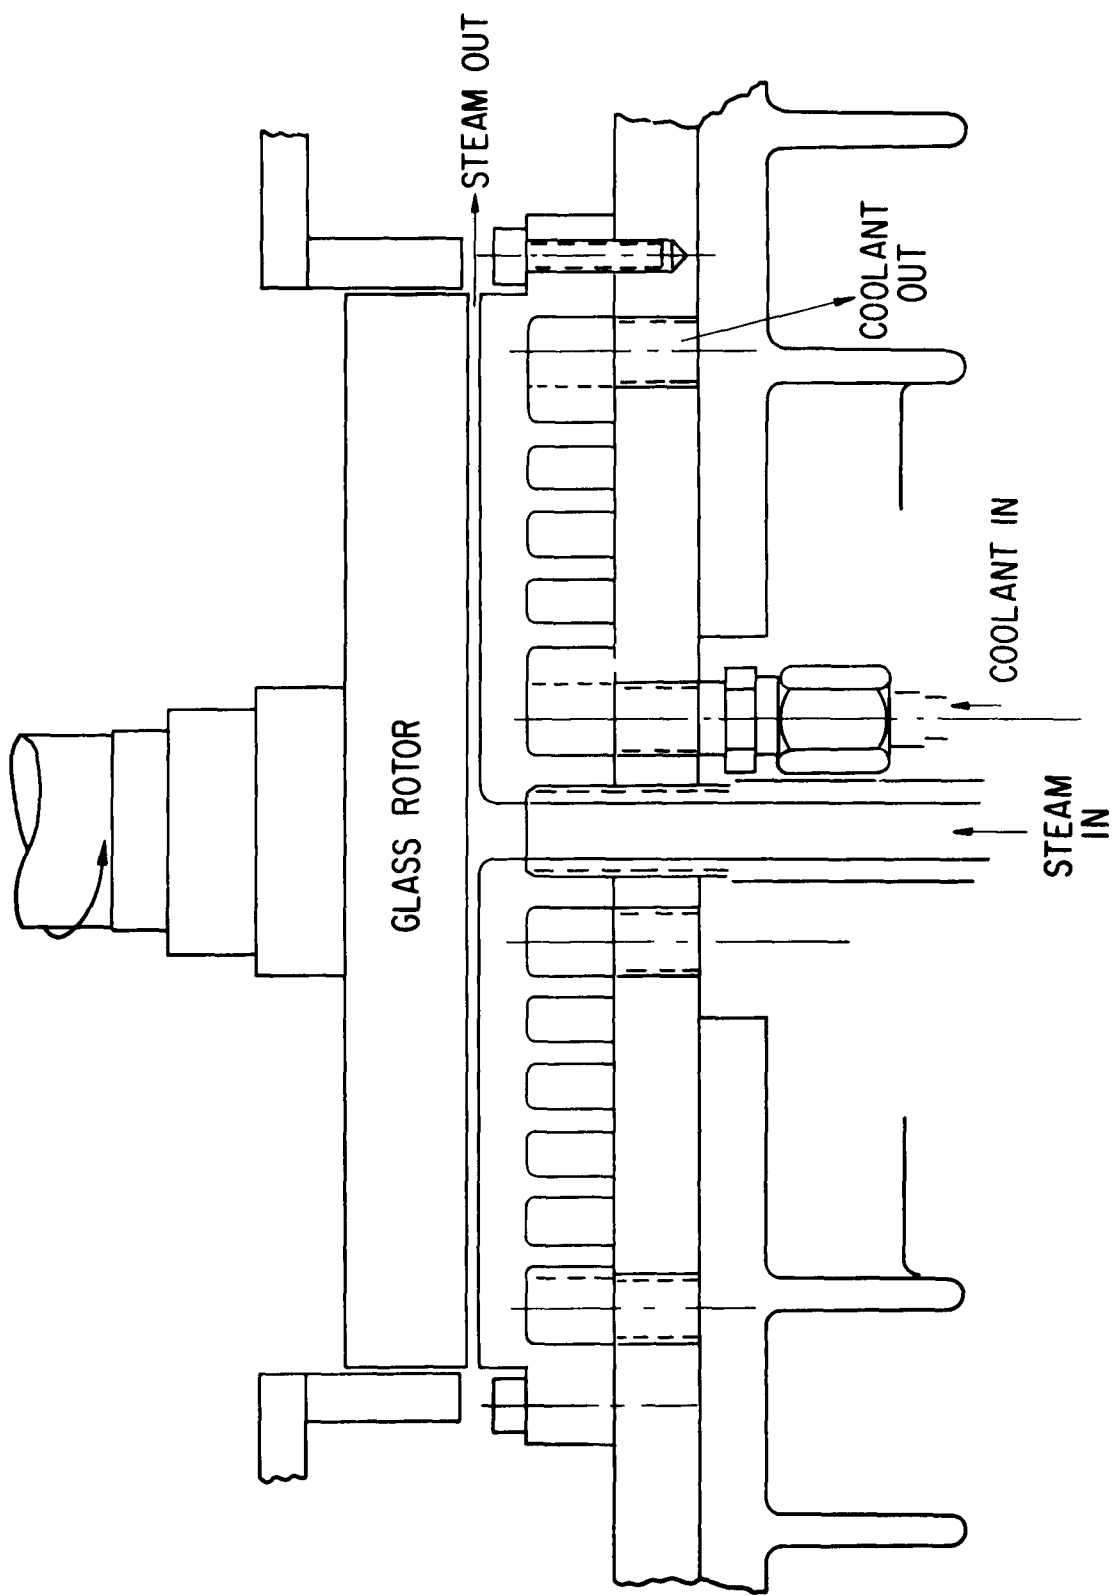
CROSS SECTIONAL VIEW OF EXPERIMENTAL BEARING
